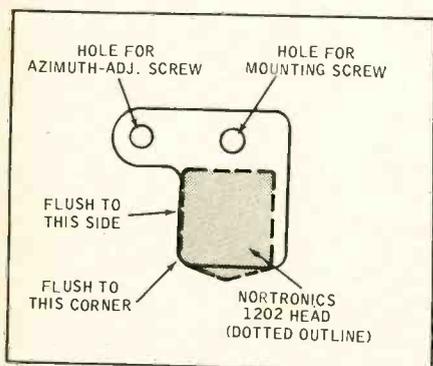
Sketch of Nortronics 1202 head mounting on the head plate to indicate location. Head is epoxied onto the plate in the position shown.
